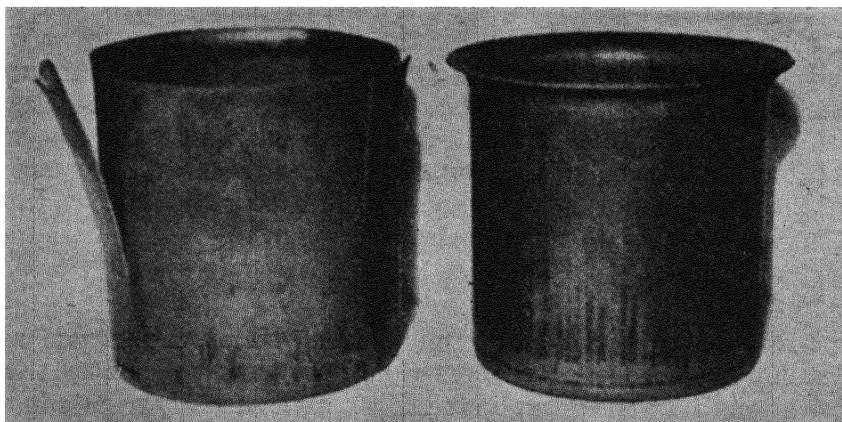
MONEL SHELLS SIMILAR TO THOSE ILLUSTRATED IN FIG. 2. BOTH WERE DRAWN FROM HARD BLANKS, THE SHELL WITH FLANGE REMAINING UNFRACTURED
